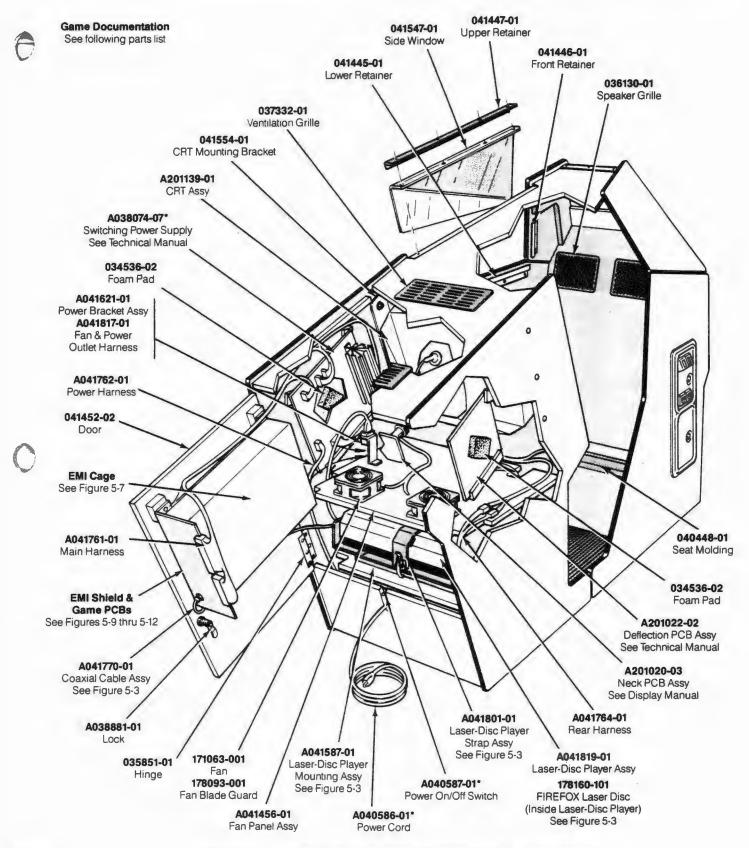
Cabinet-Mounted Assemblies, continued US-Built A041411-01 A Ireland-Built A041411-03 A
